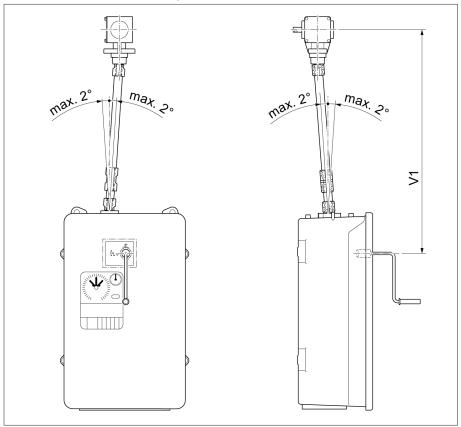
Drive shaft without cardan joint and with insulator (= special model)
